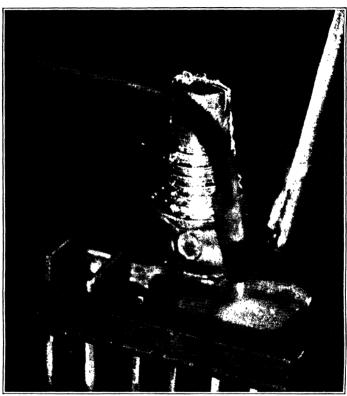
Welding a lead battery plate to a collector strap. Note the steel form, the torch position, and the lead filler rod just being added
